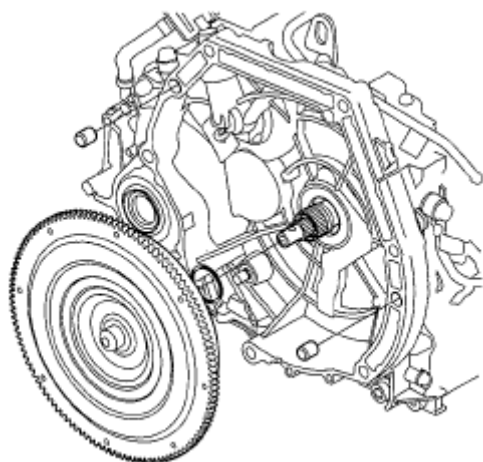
Identifying Torque Converter, O-Ring And Dowel Pins
